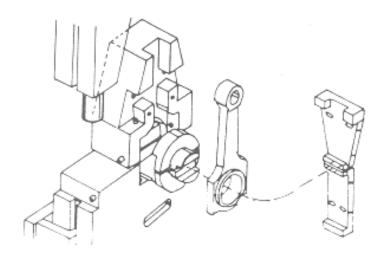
Impact Fracture Splitting Fixture.
